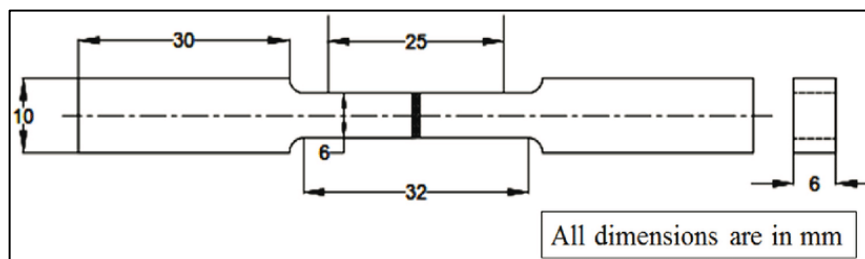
Tensile test welded joint samples dimensions.
